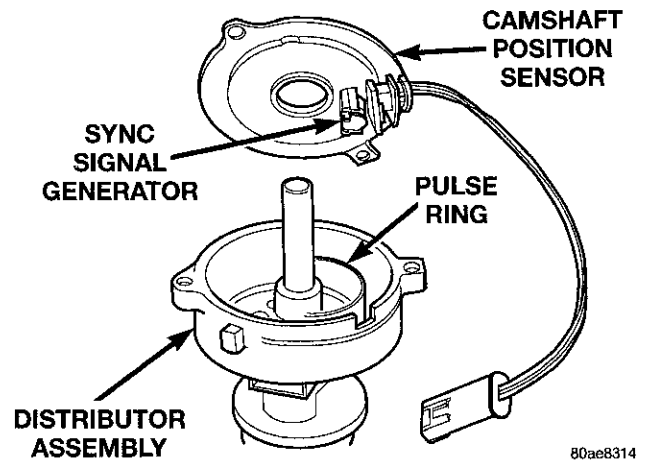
Camshaft Position Sensor—3.9/5.2/5.9L Engines—Typical
